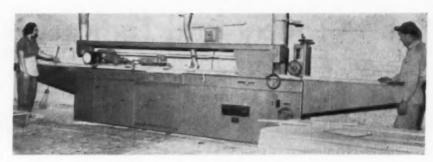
The Molsander Model 100 will sand any length of variously shaped moldings
